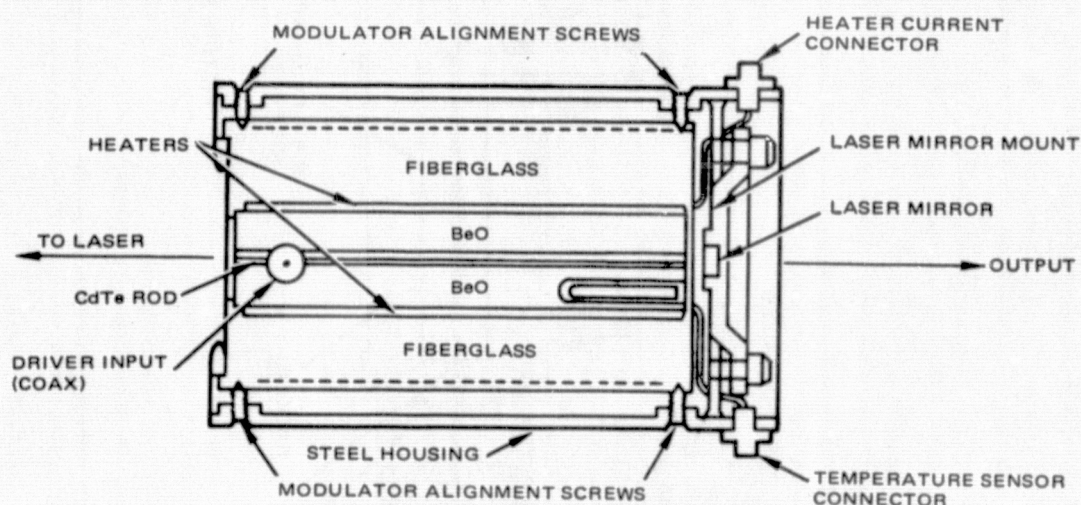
LASER MODULATOR MECHANICAL ASSEMBLY
